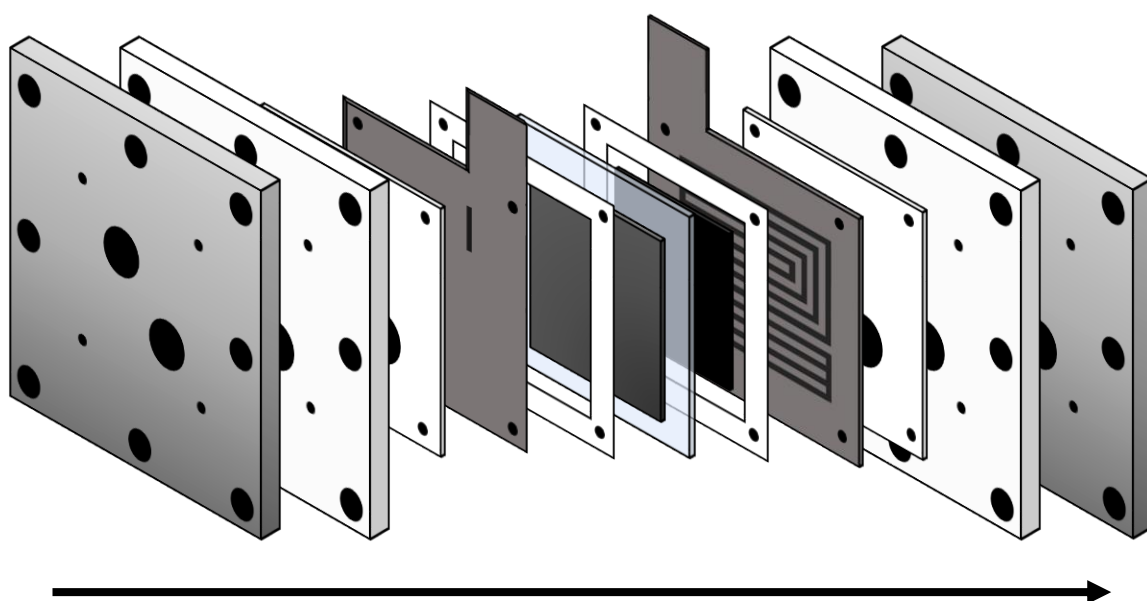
Schematic showing an exploded diagram of the flow cell. From left to right: end plate, insulating plate, gasket (0.51 mm thick), current collector, gasket (0.13 mm thick), anode, PEM, cathode, gasket (0.25 mm thick), current collector, gasket (0.51 mm thick), insulating plate and end plate.
